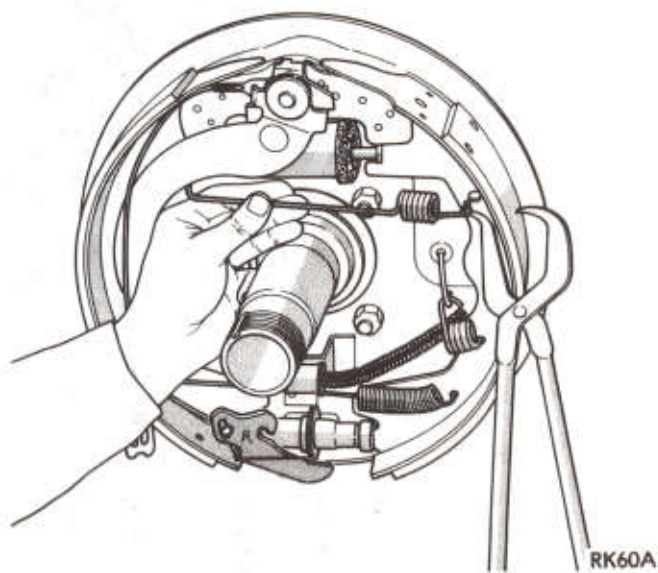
Removing or Installing Shoe-to-Shoe Spring (Rear)
